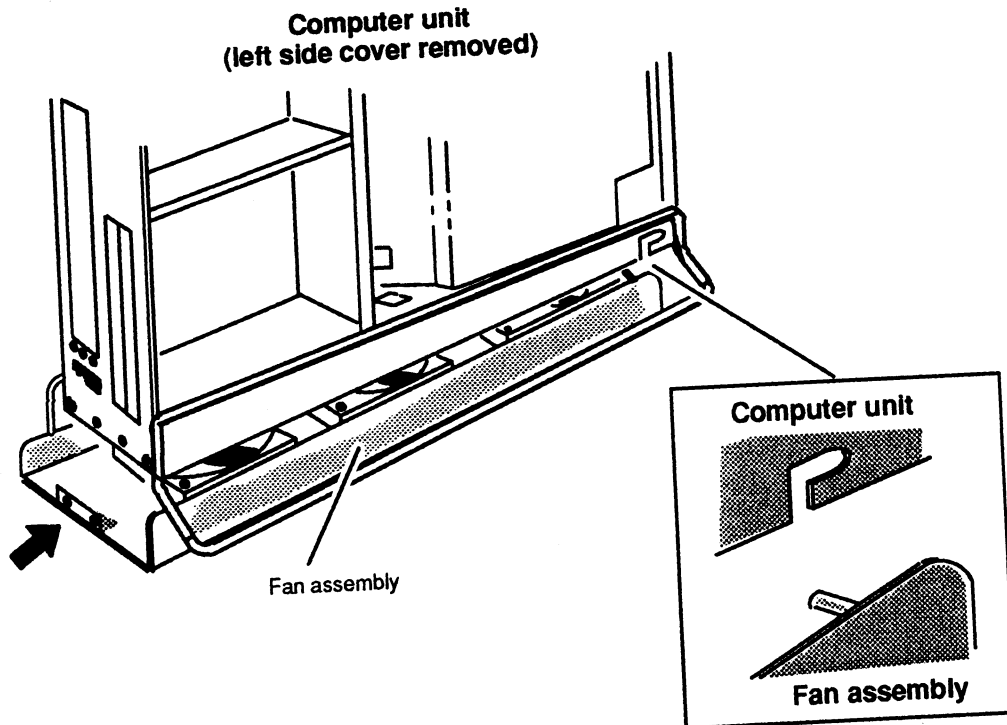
Installing the Fan Assembly in the Computer Unit
